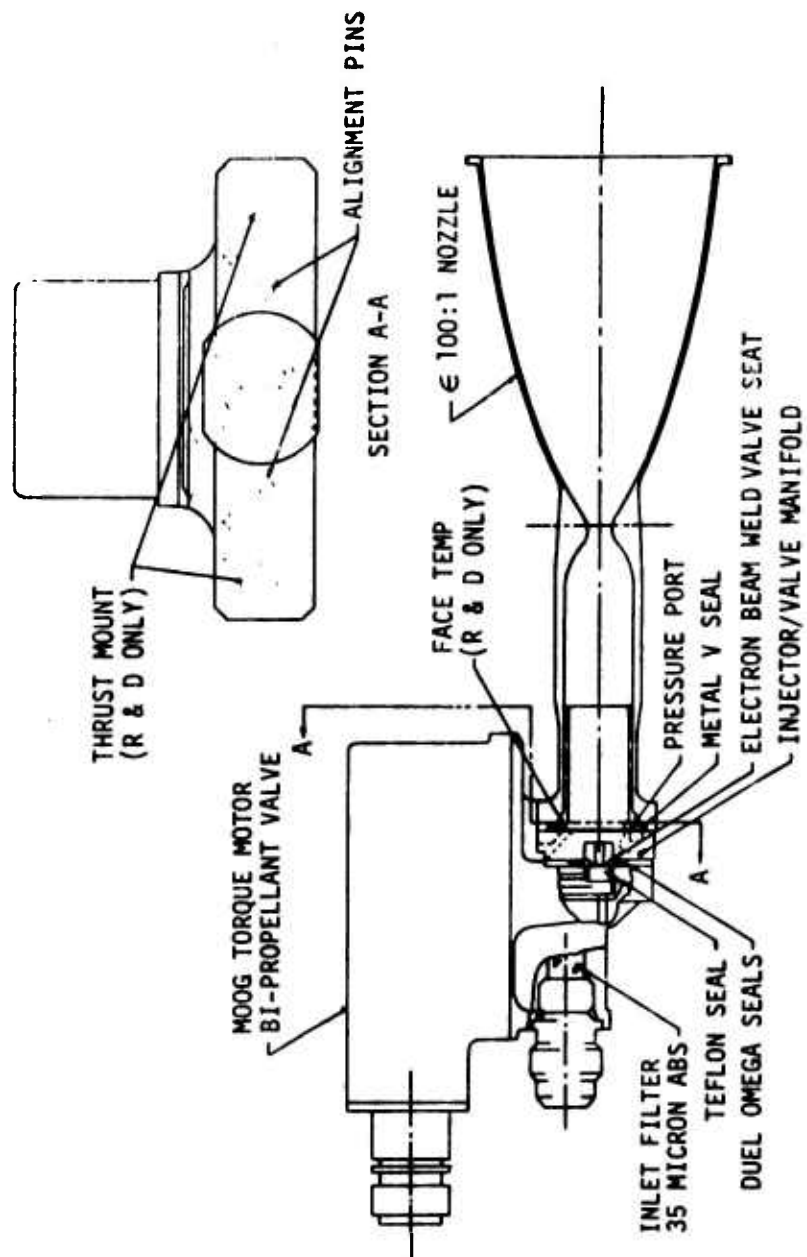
5 1b Thrust Bipropellant Engine Thrust Chamber Assembly
